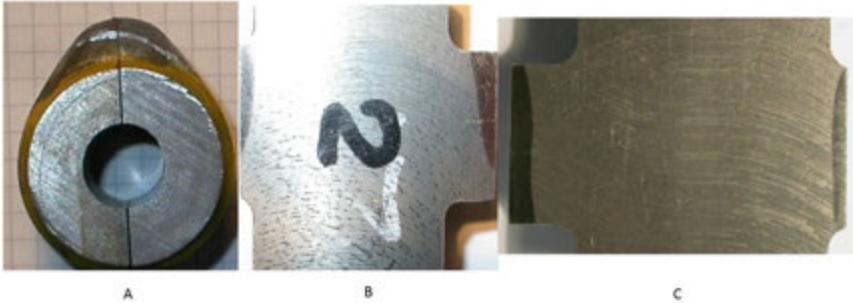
Cams: *A – cross-section, B – bad hardening (eccentric), C – satisfactory hardened layer
